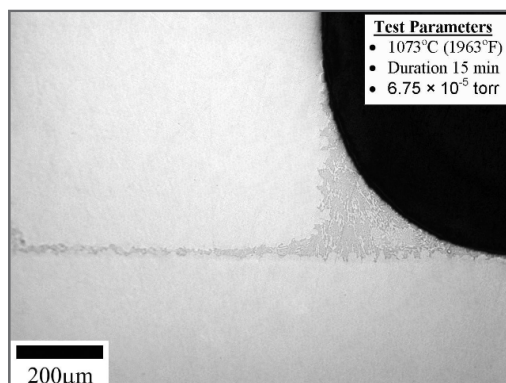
316L stainless steel brazed T-piece cross section; (x100 magnification)
